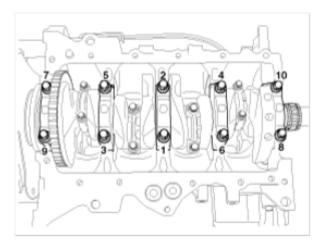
Identifying Bearing Cap Bolts Tightening Sequence Courtesy of HYUNDAI MOTOR AMERICA
